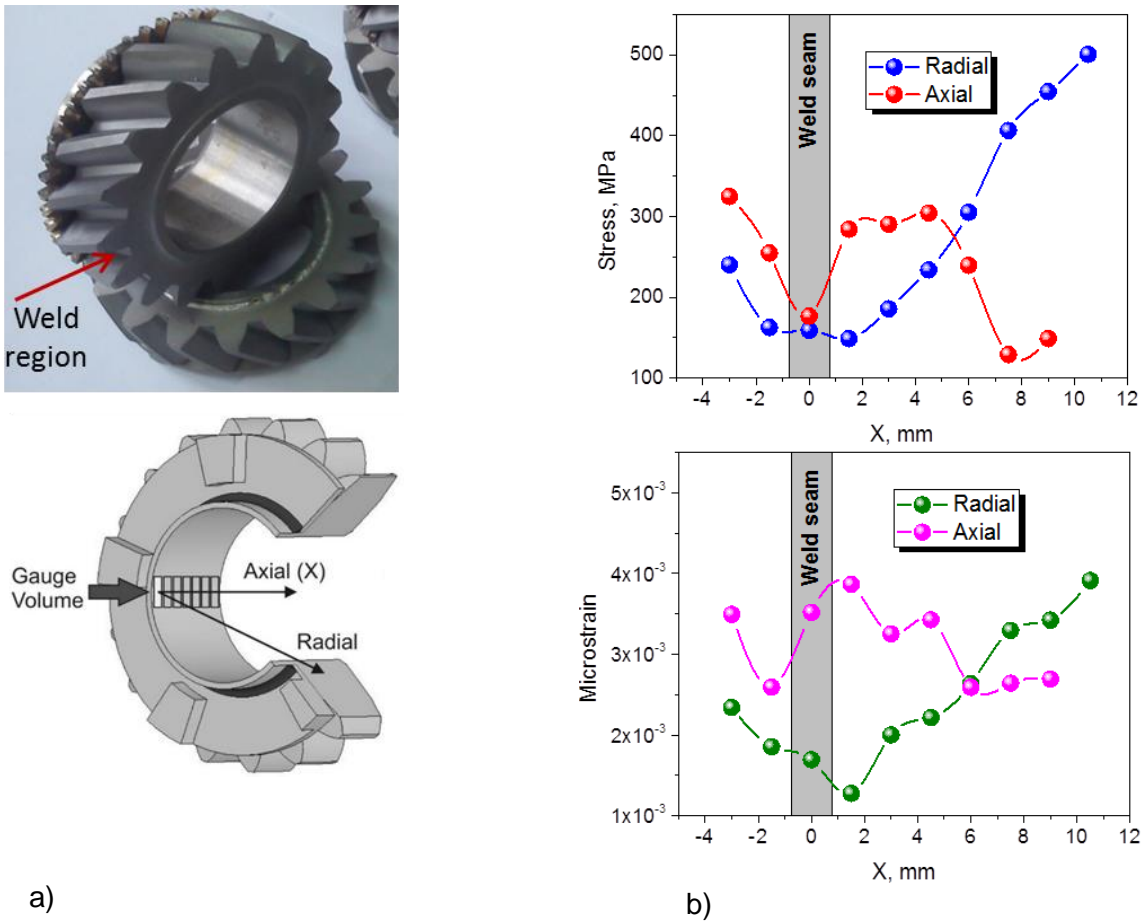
a) Photo of toothed gears welded by electron beam welding and scheme of the measurement of residual stresses in the toothed gear. b) Distribution of residual stresses (top) and microstrains (bottom) in the toothed gear welded by electron beam welding.
